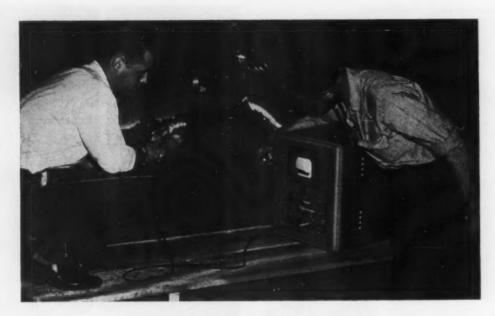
lb crankshaft being inspected with a Sperry Reflectoscope prior to final heat treatment. Todd Gardner, author of this paper, is holding the crystal while R. M. Peterson, Laboratory Technician, is inspecting the screen pattern.
